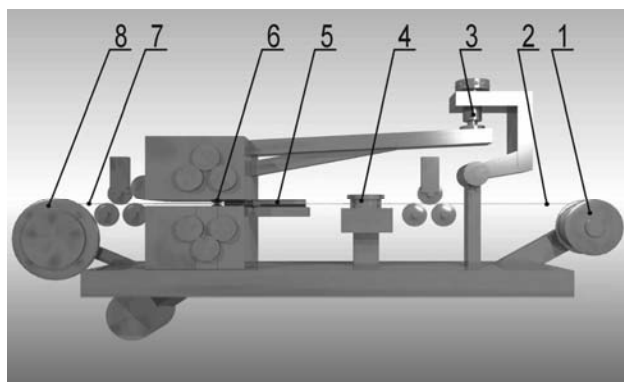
Diagram of rolling mill(1-unwinder, 2- wire, 3- screw to regulate the pressure, 4-container with lubricant, 5-rolling train, 6-rolling balls, 7-strip, 8-decoiler)
